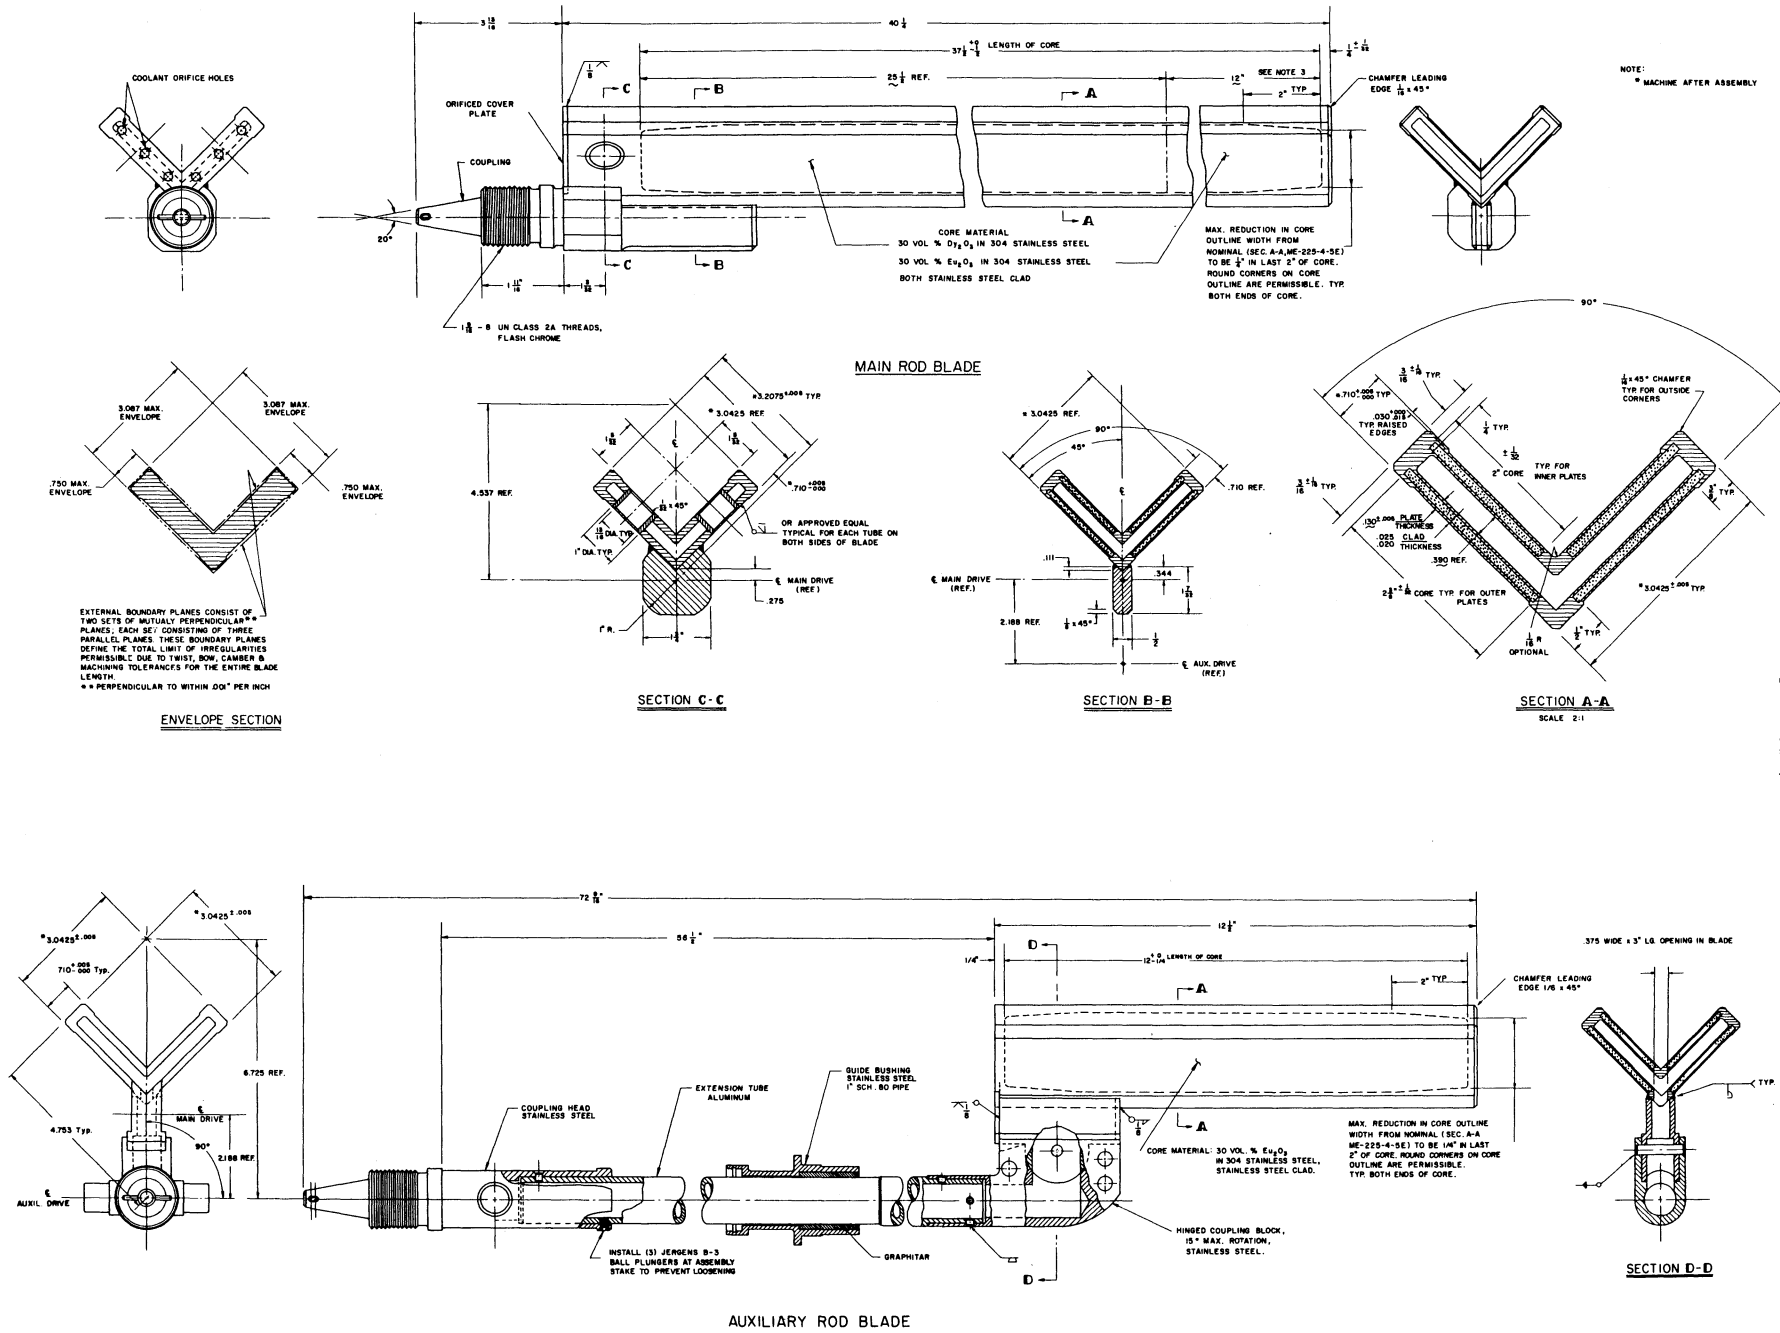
Detailed drawings of the main and auxiliary control rod blades.
